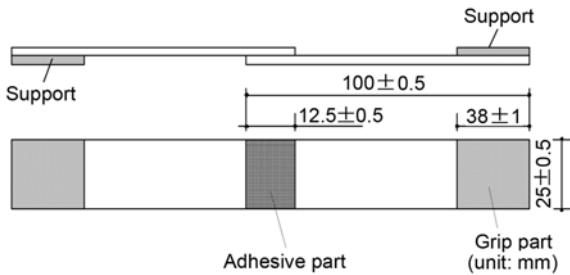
Typical geometry of specimens used in tensile-shear bond tests
